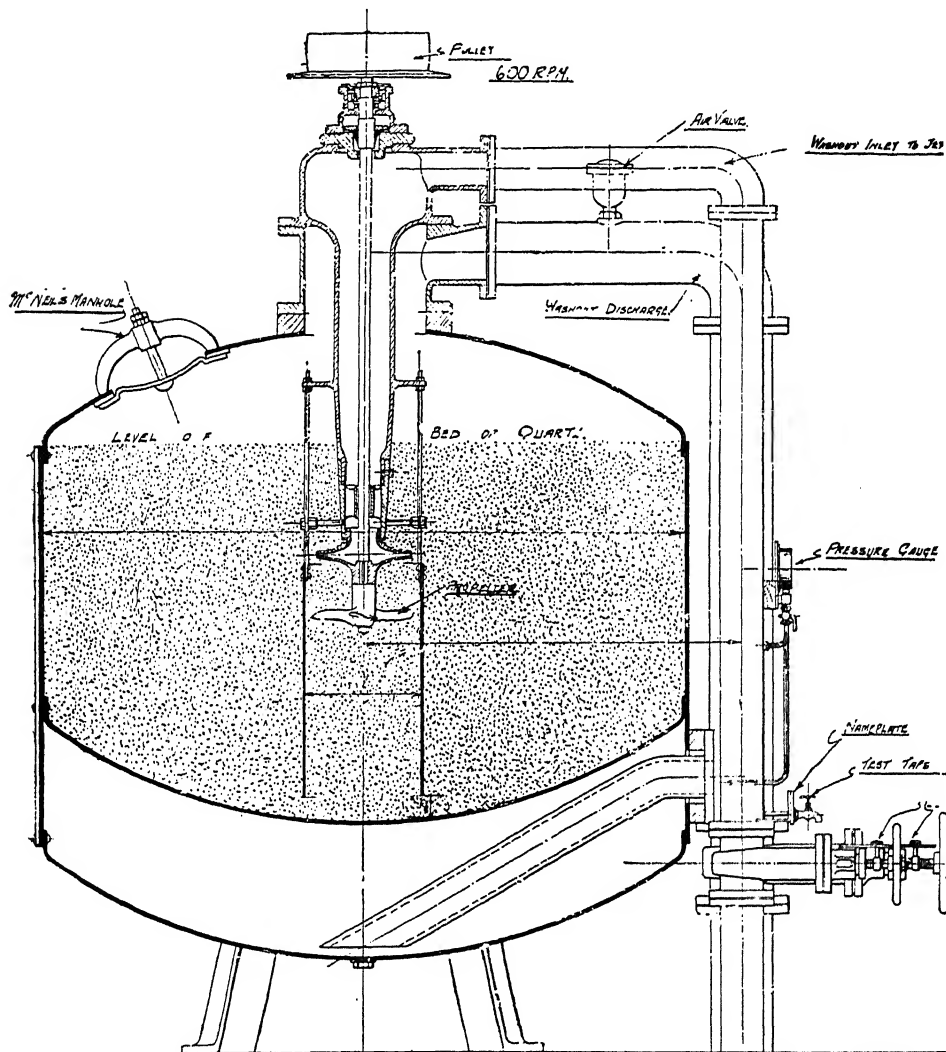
MATHER AND PLATT'S PRESSURE FILTER.
